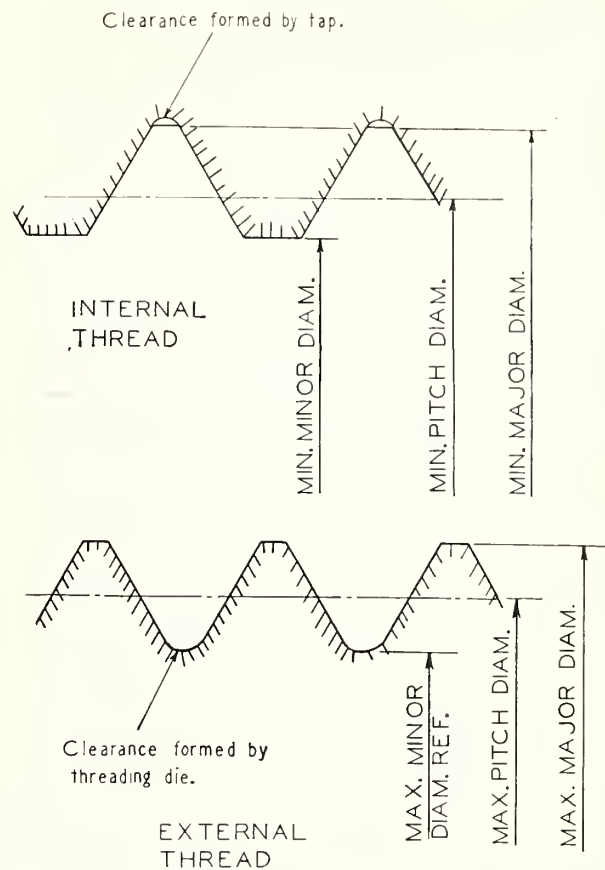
Thread dimensions to be determined for a special thread.
